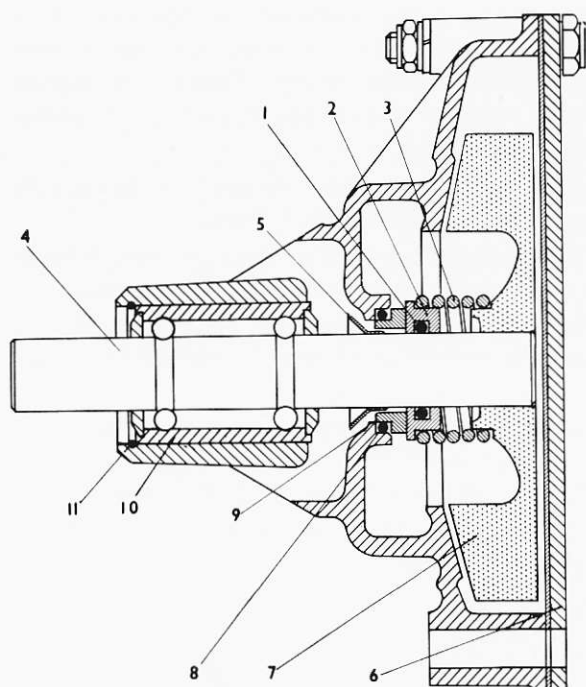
Sectional view S1 cars — coolant pump without refrigeration
